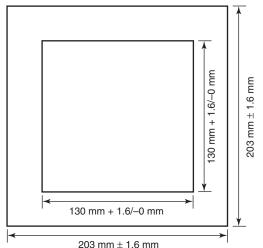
Lower specimen mounting plate.
